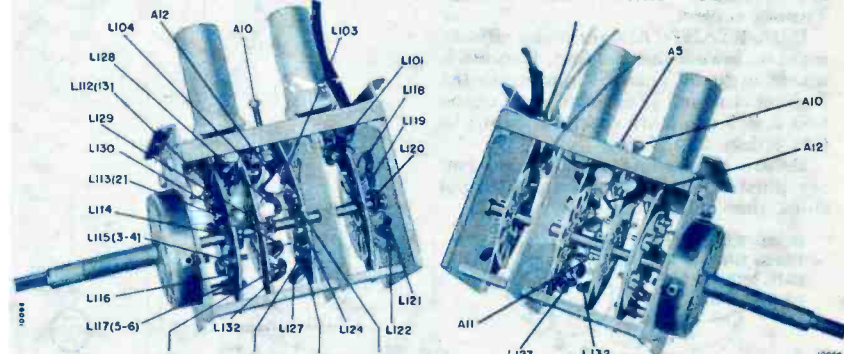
Left Side View of Tuner 94D77-1 Showing Adjustment Locations.
